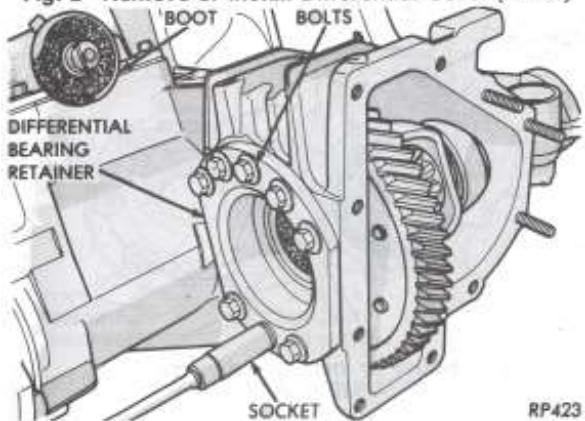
Differential Bearing Retainer Bolts (A-525)
